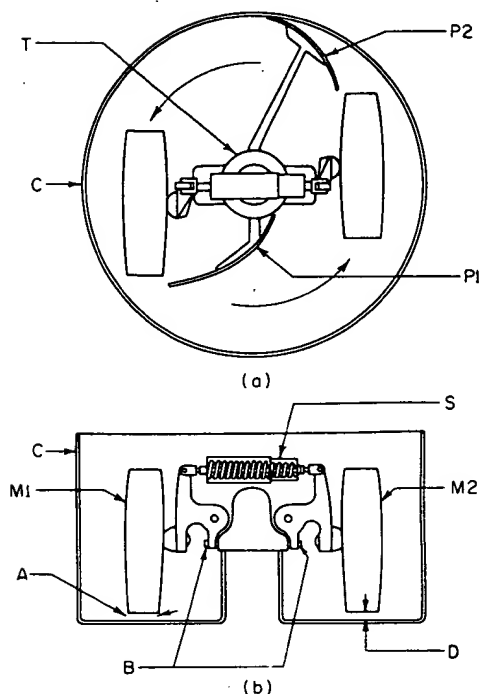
Pan muller. (a) Plan view. (b) Sectional elevation. [Bullock, Chem. Eng. Prog., 51, 243 (1955), by permission.]
